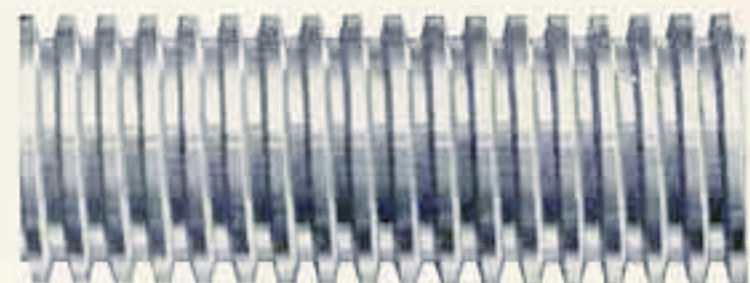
Section of lead screw, actual diameter, used on the 13-inch South Bend Lathe.
